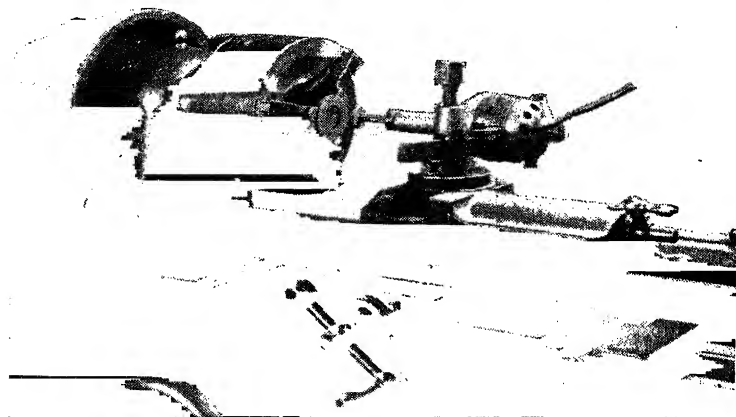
A small internal grinding attachment shown fitted to the lathe.
